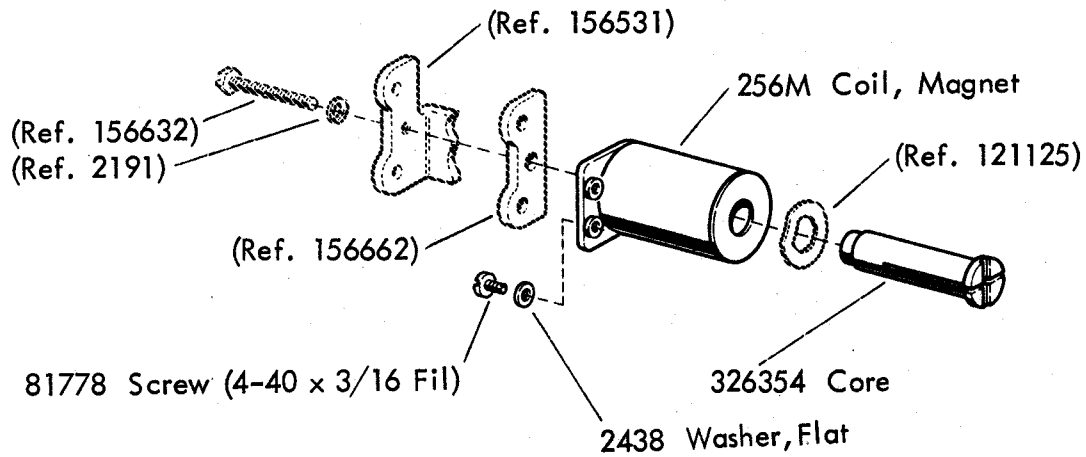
Start-Stop Contact and Clutch Trip Parts for Transmitter Distributor (LXD)
